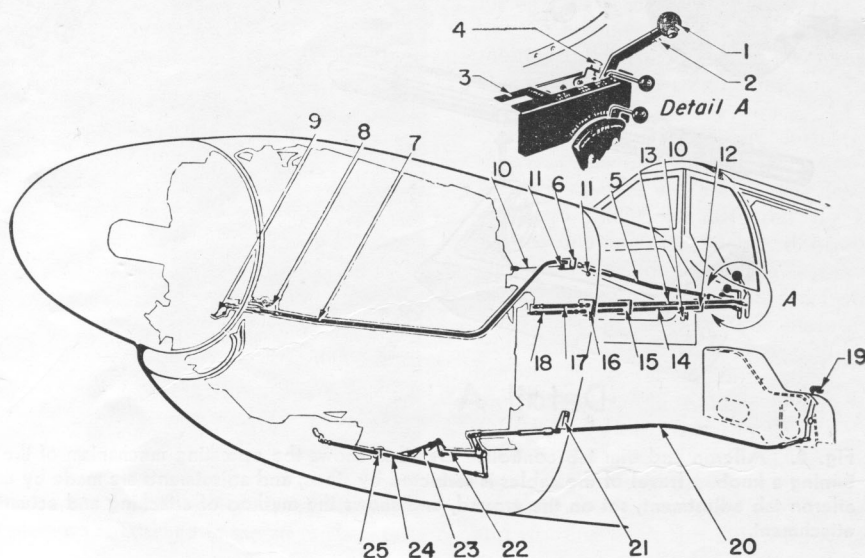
Engine controls: (1) engine throttle control; (2) throttle stop release, (3) throttle name plate; (4) adjustable throttle stop; (5) quadrant to bell-crank flexible control; (6), (11), (12), (15), (16), (25) fair-leads; (7) flexible control; (8) propeller control bracket; (9) propeller control bell crank; (10) emergency boost control handle; (13), (14), (17), (18) control rods to jackshaft; (19) carburetor air control; (20) flexible air control; (21) air control support; (22) jackshaft, hot-air control; (23) hot-air door-actuating rod; (24) air shutoff control rod; (25) shutoff rod support.
